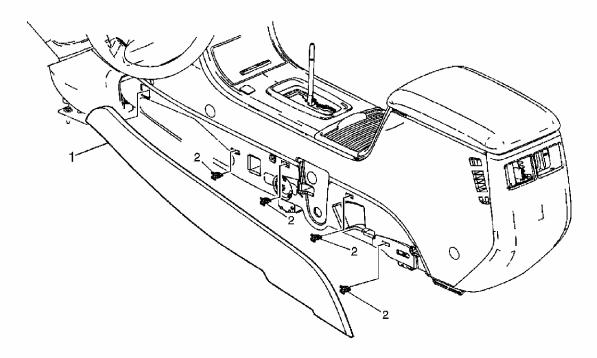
View Of Console Trim Panel - Left Courtesy of GENERAL MOTORS CORP.
